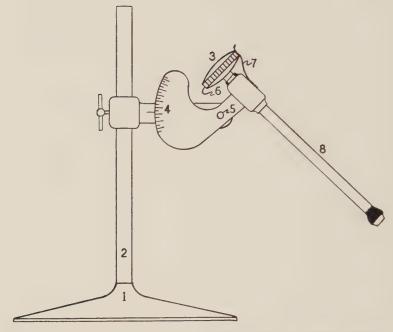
Mechanical Dopping and Holding Device For Facet Cutting. 1, base; 2, stand rod; 3, notched wheel; 4, vernier scale; 5, hinge; 6, index scale; 7, locking spring; 8, dop stick.
